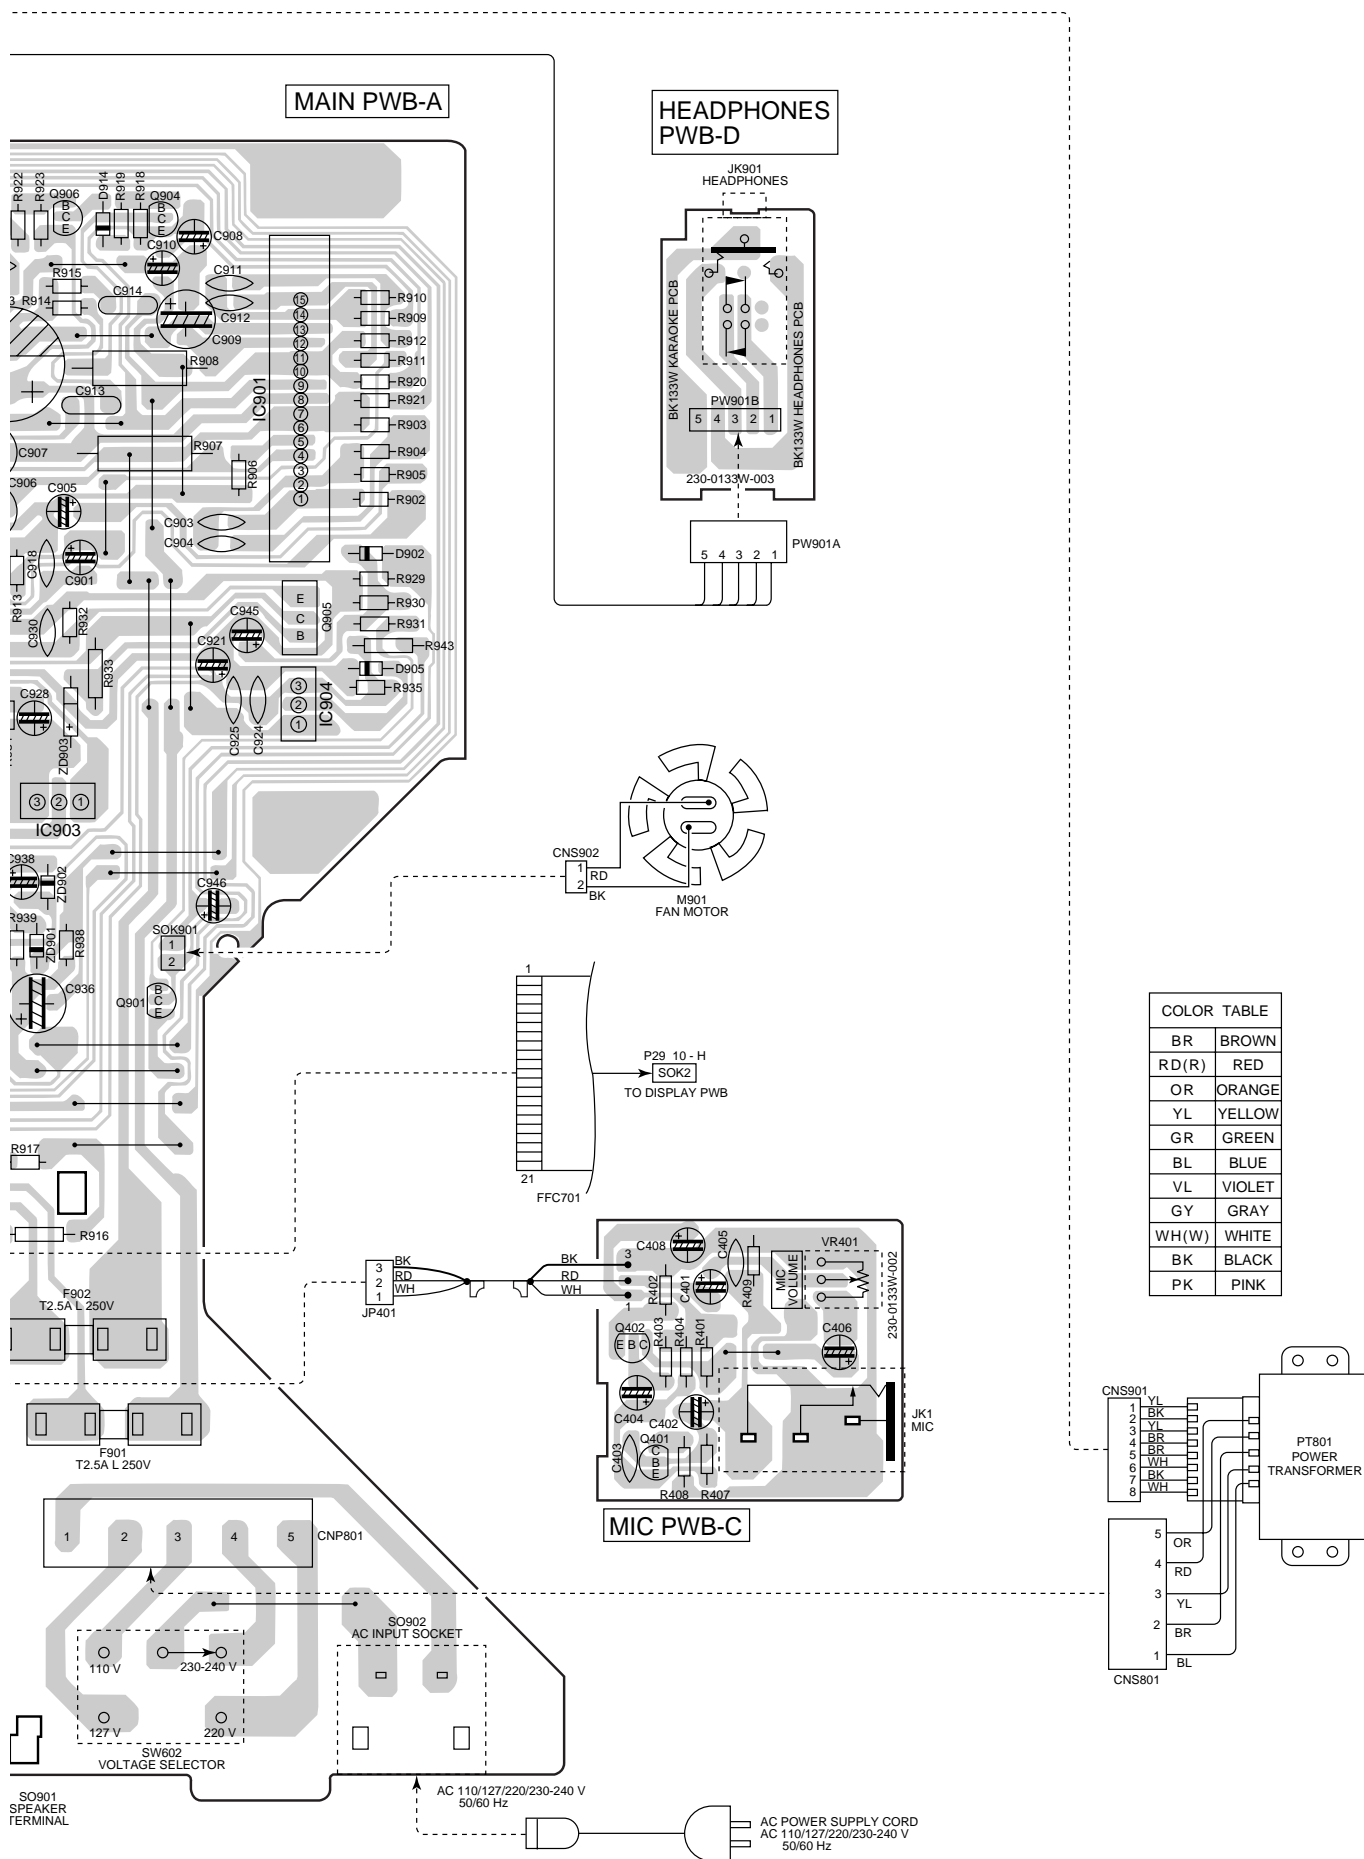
WIRING SIDE OF P.W.BOARD (2/6)
